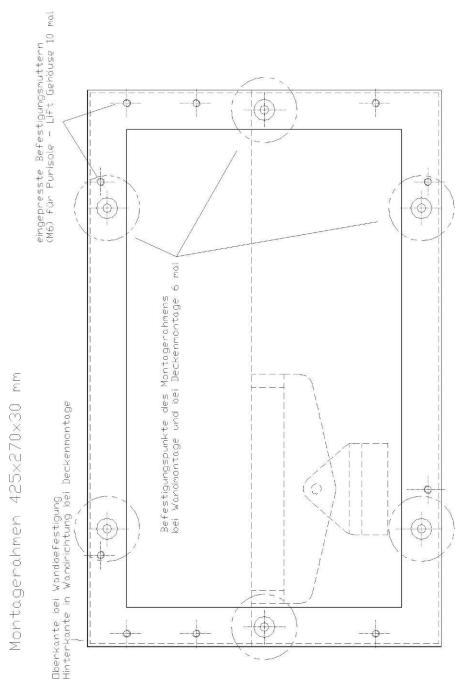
Installation frame: 425 x 270 x 30 mm
